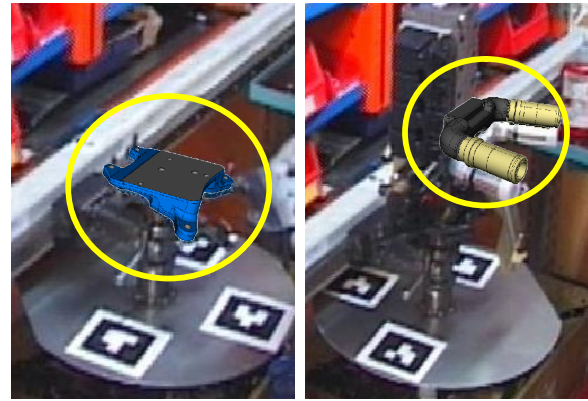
On the left the first part is assembled to the fixture. On the right the real parts are assembled, and the worker is shown the next virtual part.
